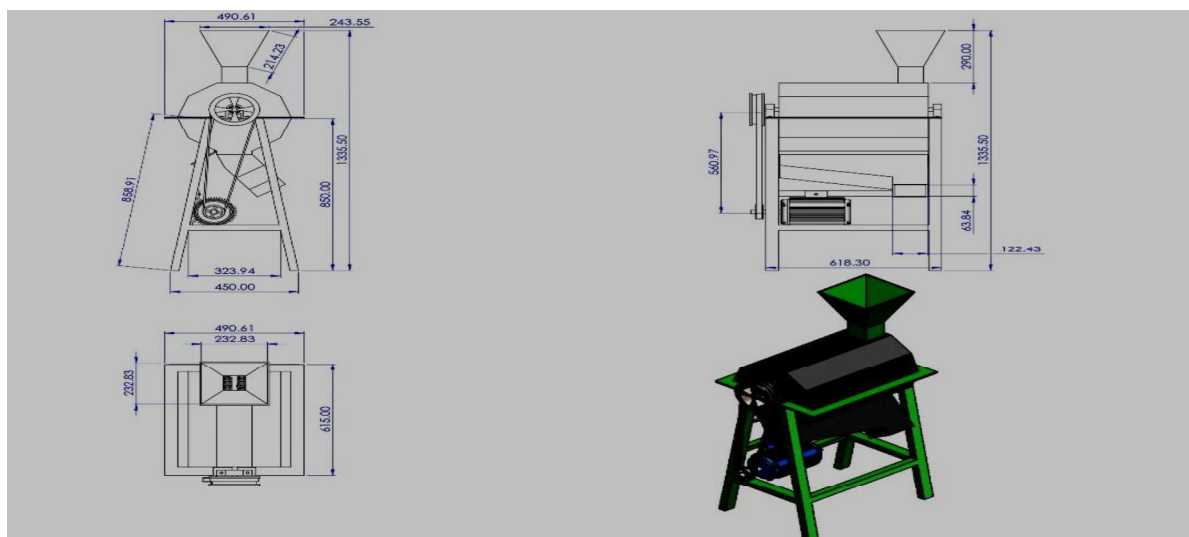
1st And 3rd Angle Projection of The Fabricated Multi-Variant Shelling Machine.
